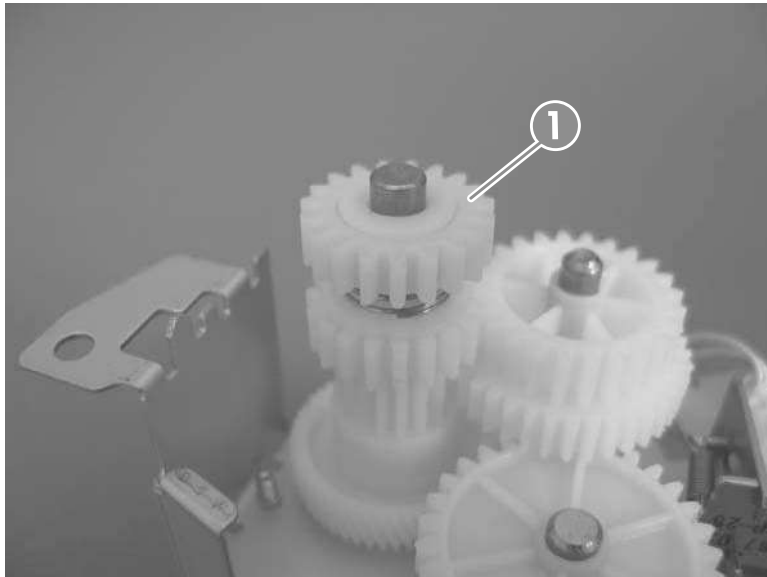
Remove the cassette pickup drive assembly (10 of 10)
